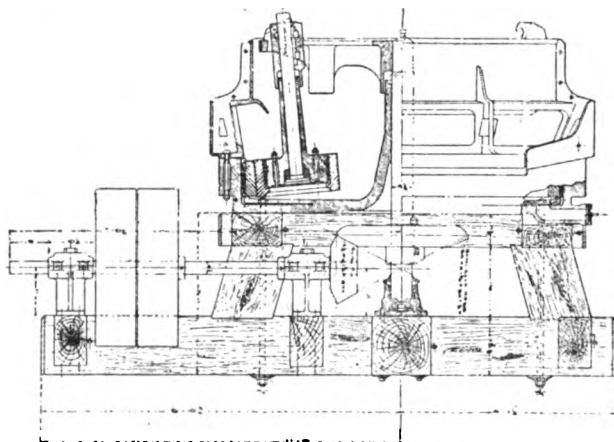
DETAILS OF HUNTINGTON-MILL CONSTRUCTION
